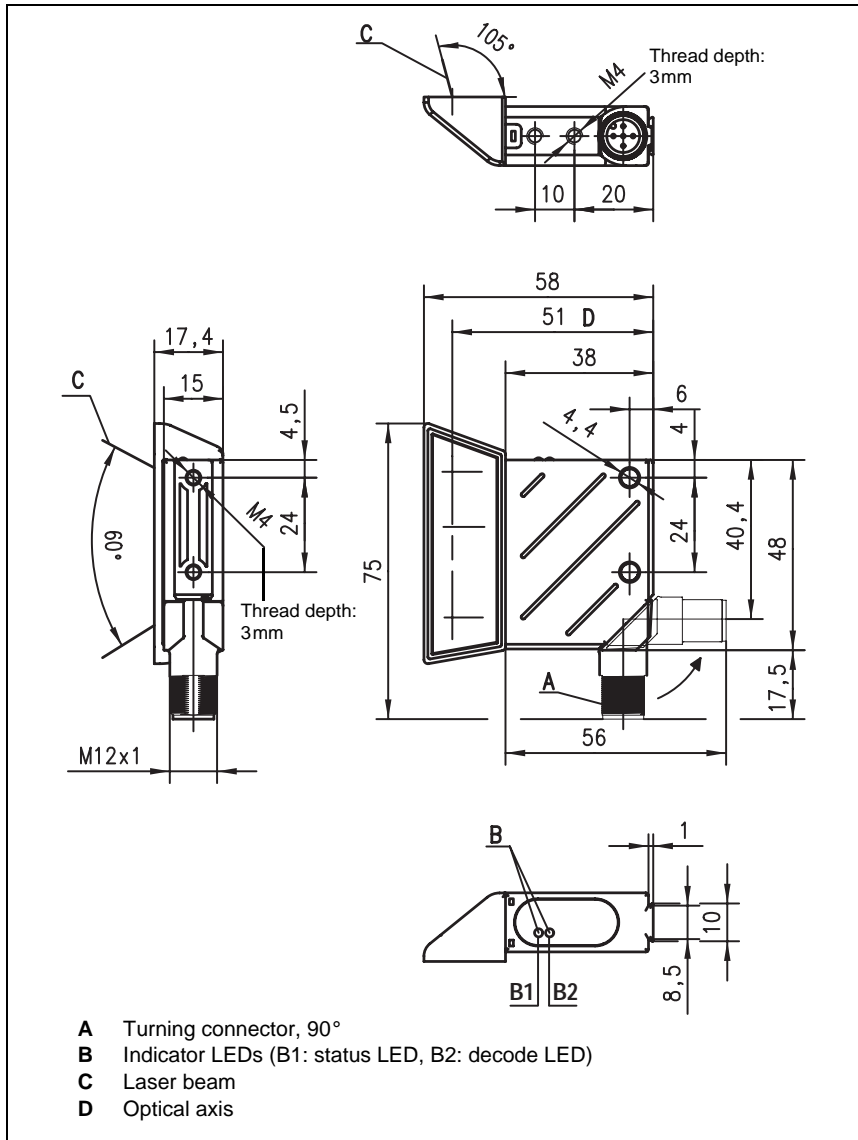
Dimensioned drawing BCL 8 S M ...0 with lateral beam exit
